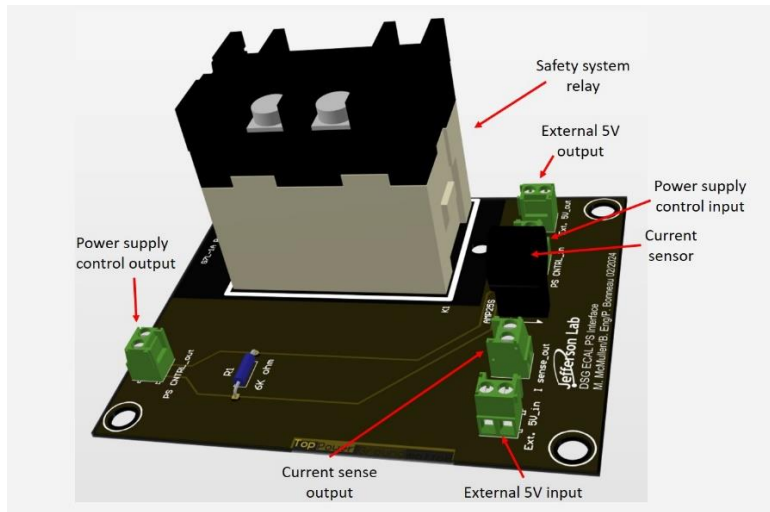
Rendering of PCB, with components, to be used in DSG-designed power supply interface chassis
